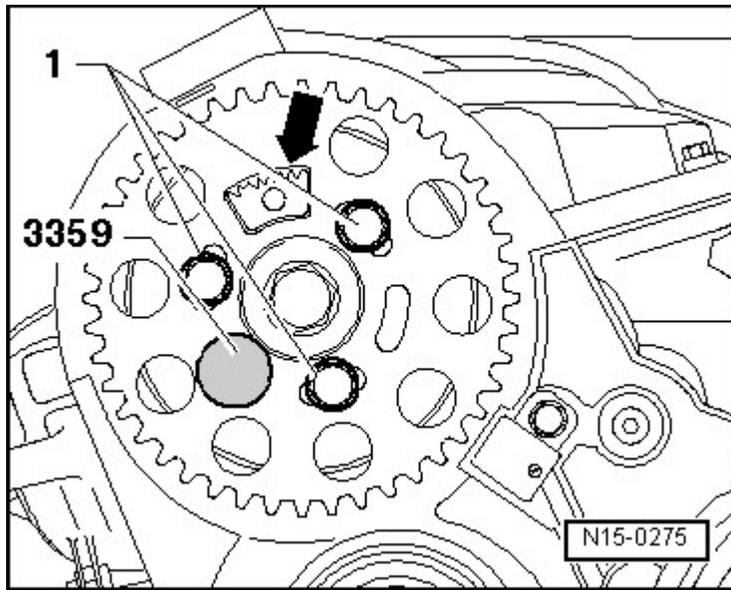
Identifying Camshaft Pulley Bolts And Toothed Segment -Arrow- Must Point Upward
